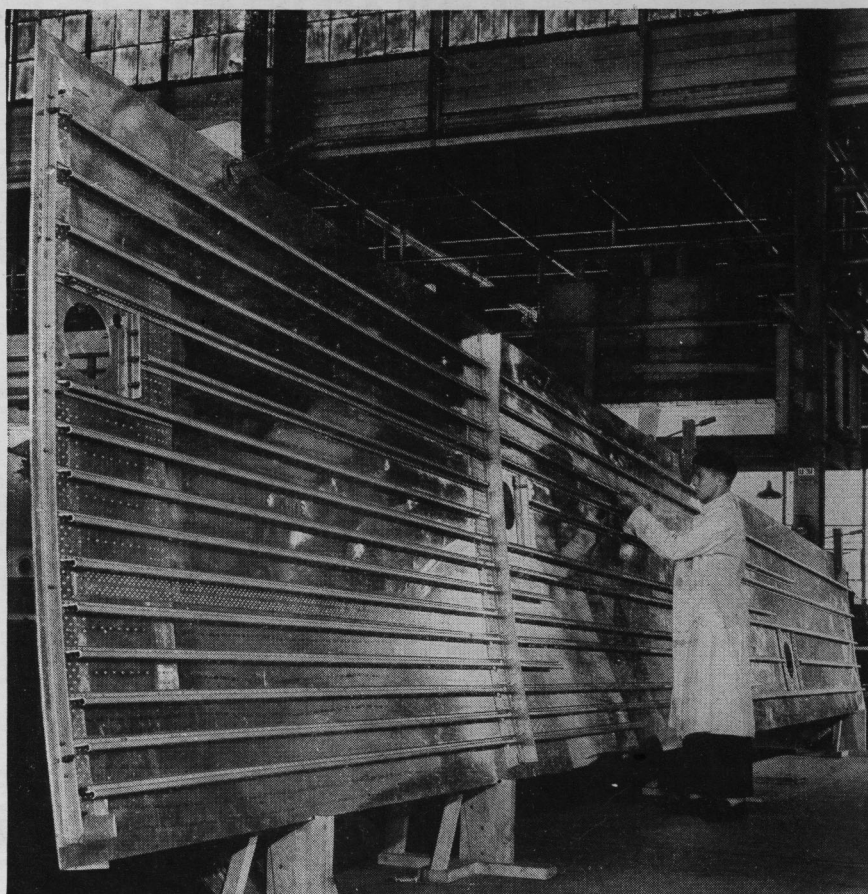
Bottom skin of C.102 main plane. The skin and stiffeners are made up as a complete subassembly prior to assembly of the main plane. The stringers are J section, and the skin of 75ST alclad is flush-riveted and leakproof.
